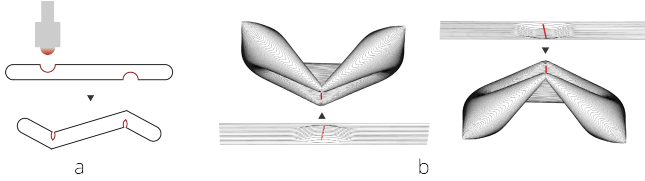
Indentation of the heat seal (a) and a string that slightly bends the hinge (b) can be used to control the bending direction.
